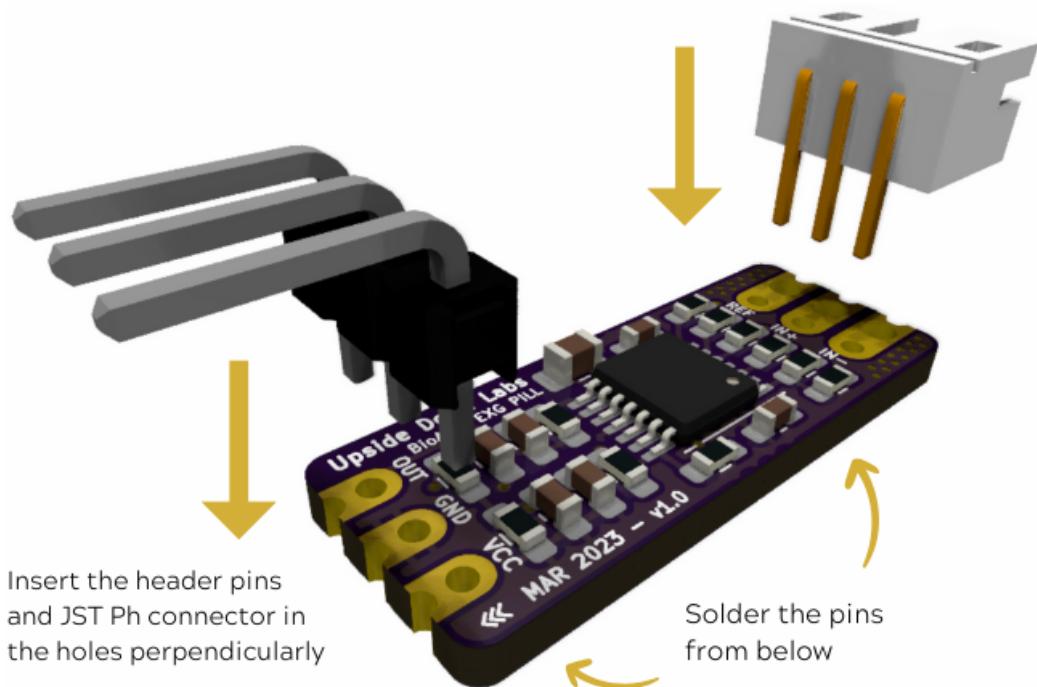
Soldering the connector & header pins on BioAmp EXG Pill
